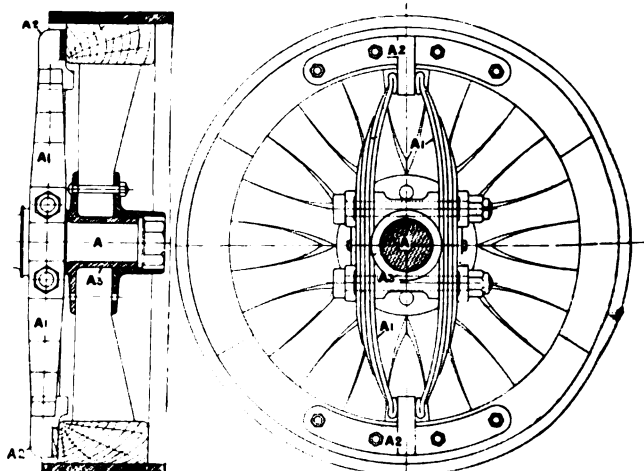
Cross section and side elevation of the Thornycroft "Spring Drive."
